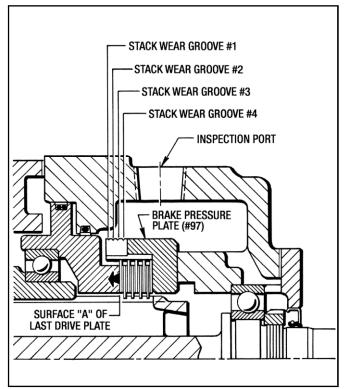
Checking Clutch and Brake Stacks for Wear
